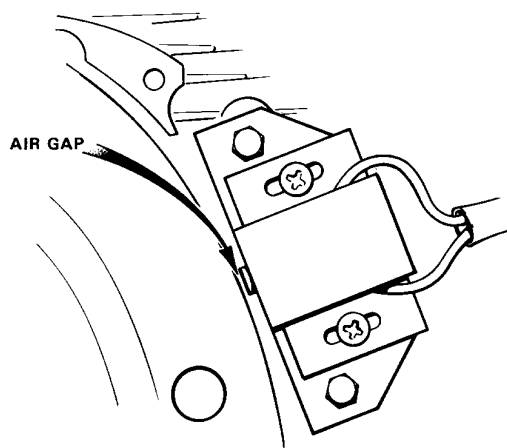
Ignition Pick-Up Trigger Unit—Location and Air Gap.
